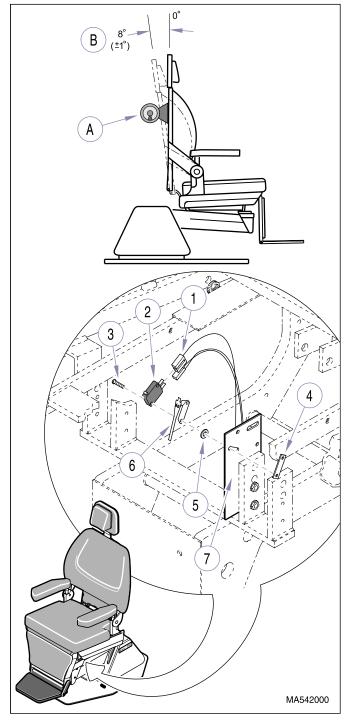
Back Up Limit Switch Removal / Installation
